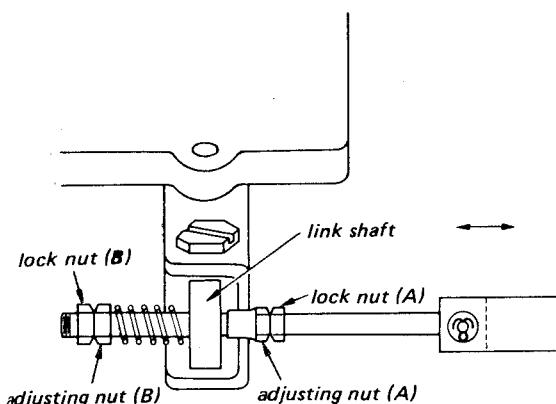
Pinch roller pressure adjustment (1)
